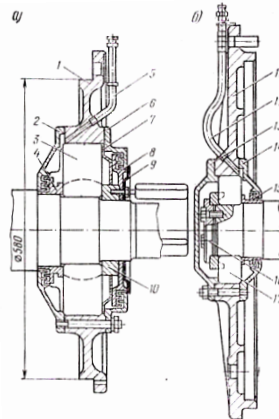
Bearing units Motor TE – 006. a – rear; 6 – front; 1 – back bearing shield;
